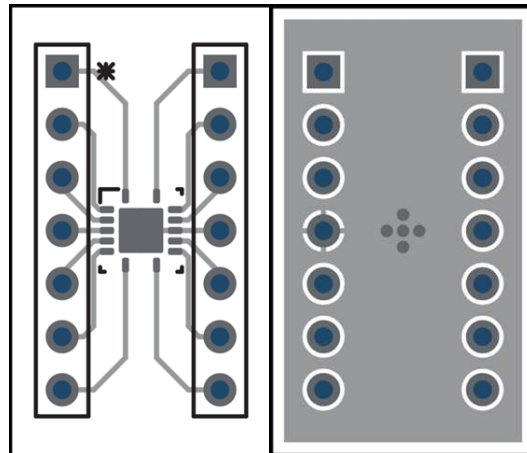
RGY package top layer (left) and bottom layer (right) PCB layout
